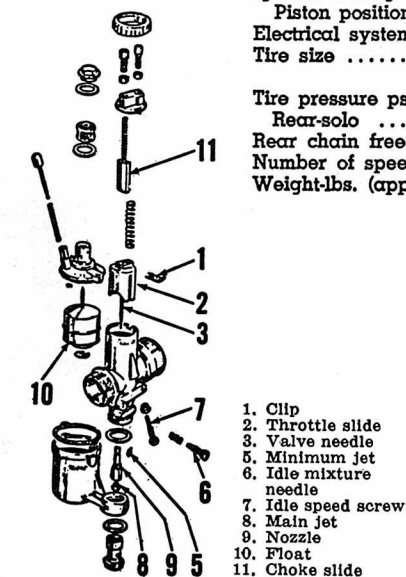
Exploded view of Del' Orto carburetor typical of type used on 160cc models.
